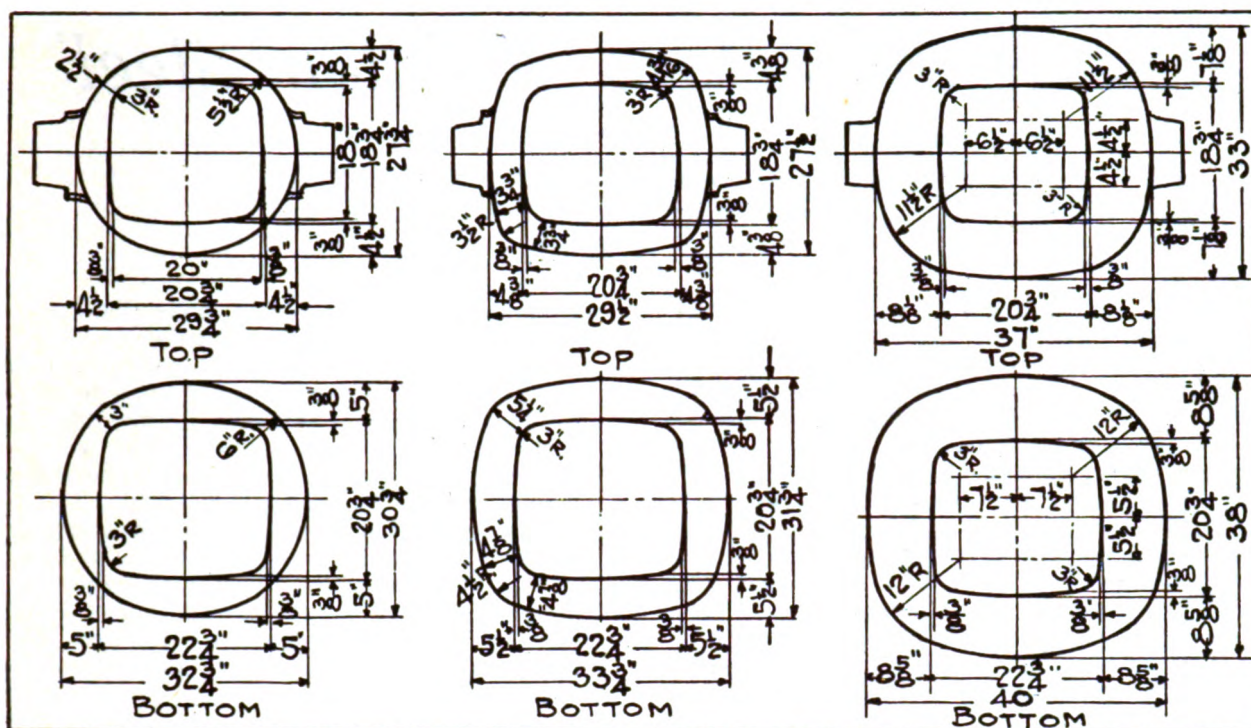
Top and bottom sections of full sized molds used for experiments.
